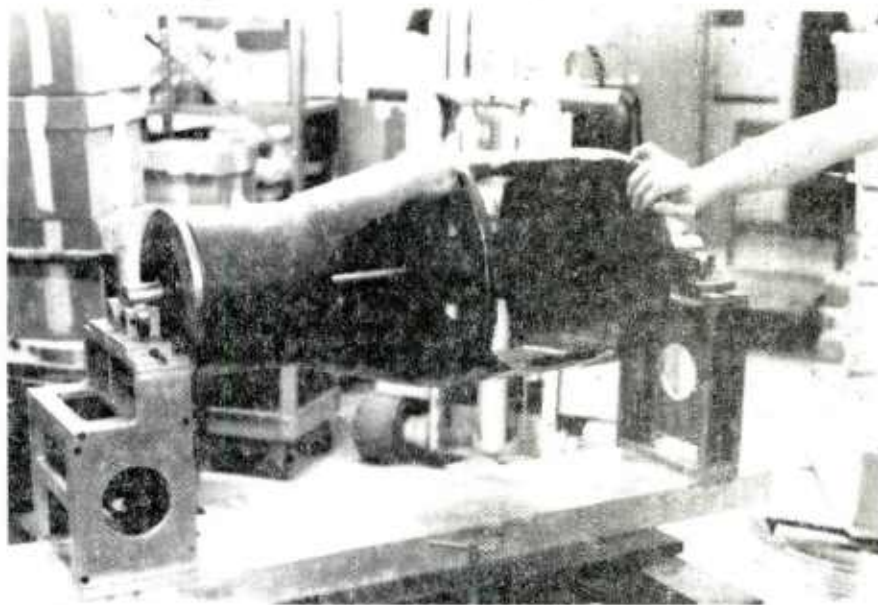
Muzzle brake assembly - in weld fixture
